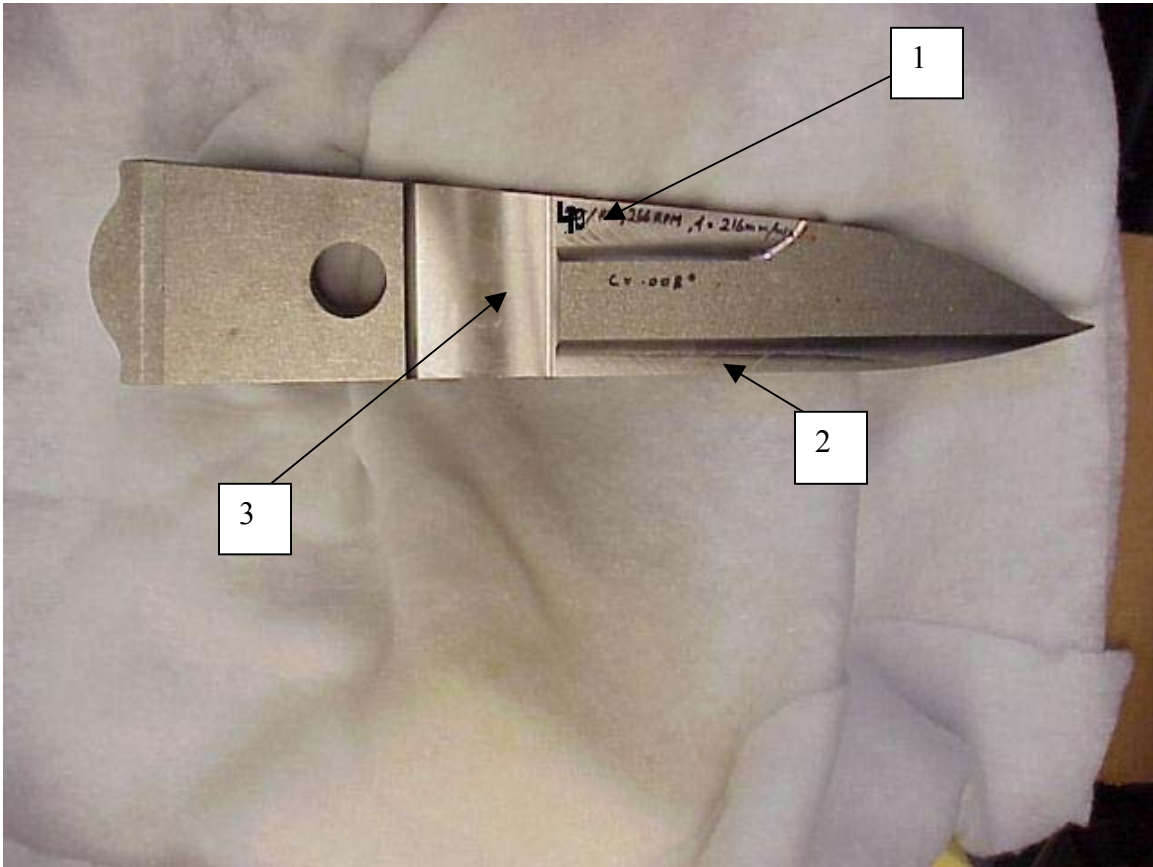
Workpiece machined using cutting parameters given in Table-3.2
